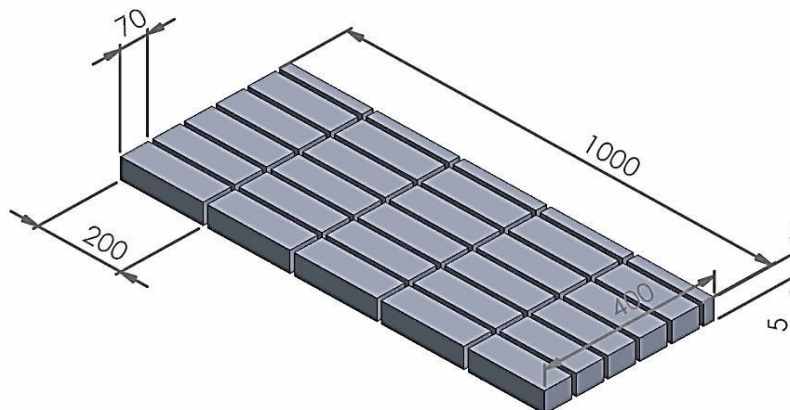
Sample dimensions of AZ31B Magnesium alloy supplied from the market and prepared for Friction Stir Welding
